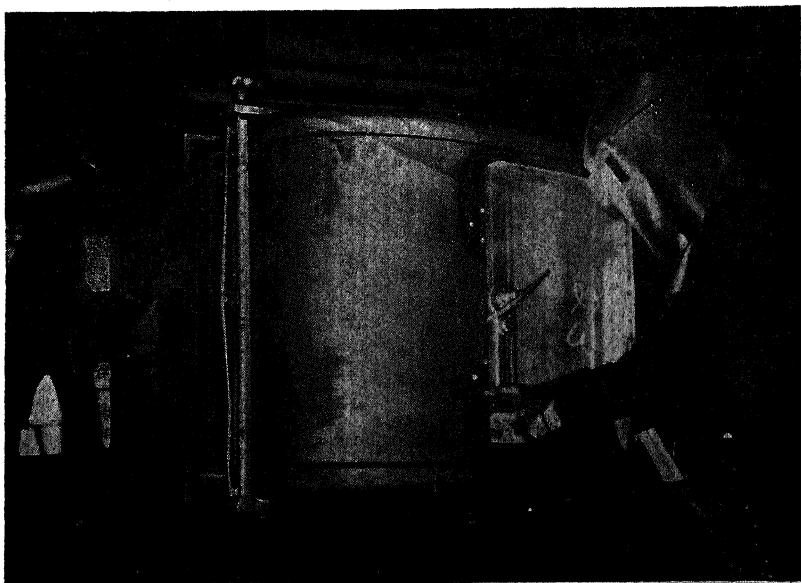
Fabricating domestic stokers from 16-gauge pressed steel parts by arc welding. Positioning jig with copper back-up fixture simplifies assembly.
